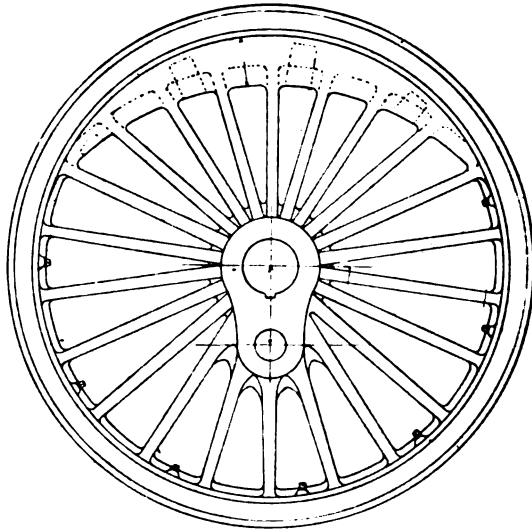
Wheels (cast steel) and Axle for Outside-cylinder Engine.
